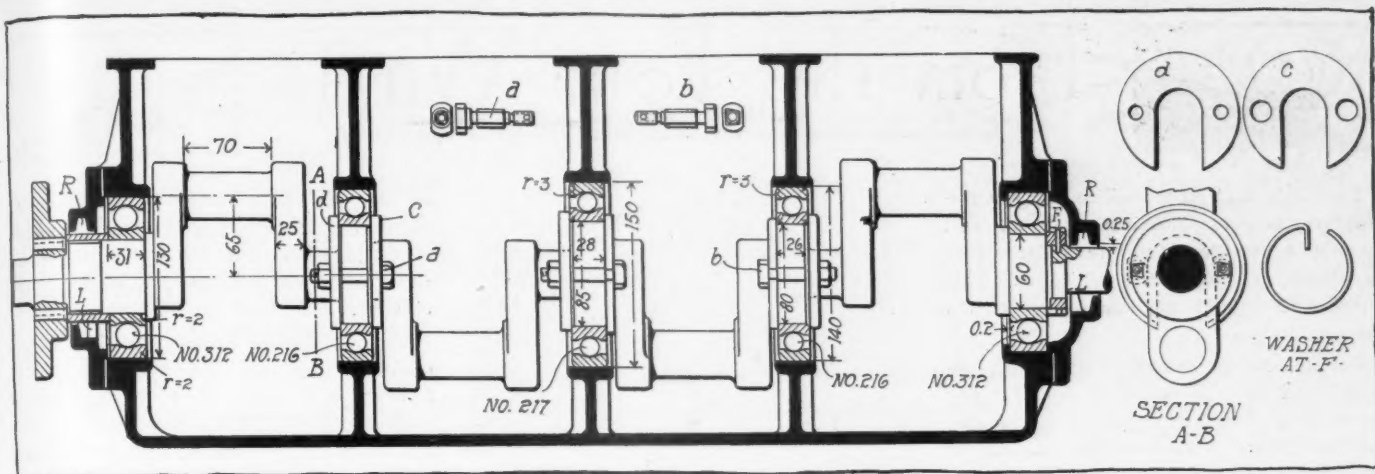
illustrates still another idea—mounting Hess-Bright ball bearings—and the arms are so trimmed that the diameters of the ball bearings do not have to be so enormous as is sometimes true. In this example one of the outer races is locked to the case to take thrust, and a snap-ring serves very nicely for the final locking means. It is interesting to note that all the arms are of the same thickness, regardless of length, and if what has already been said about this matter is true this phase of the design is below a certain standard.
